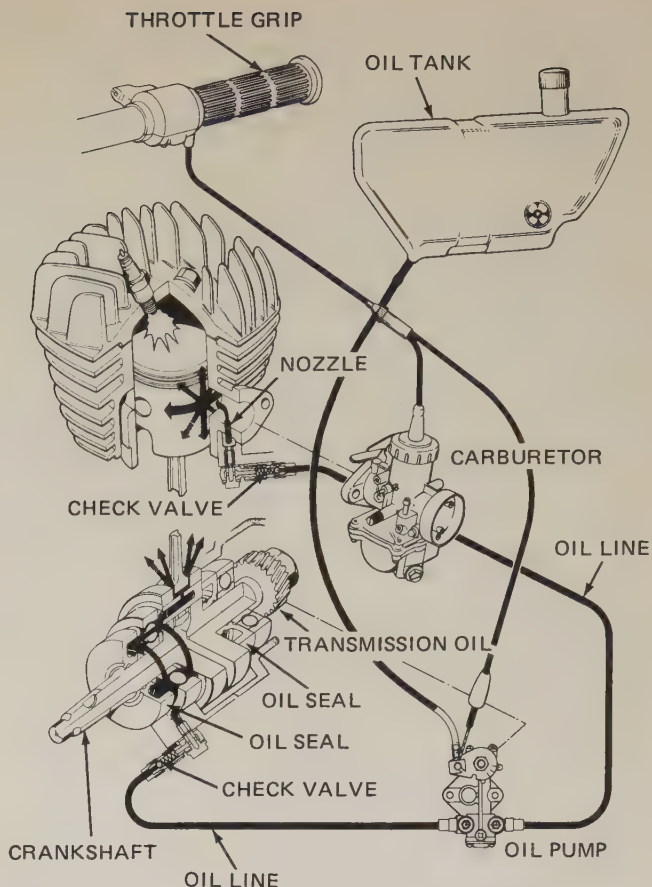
Lubrication system for a one-cylinder two-cycle motorcycle engine. (Suzuki Motor Company, Ltd.)
